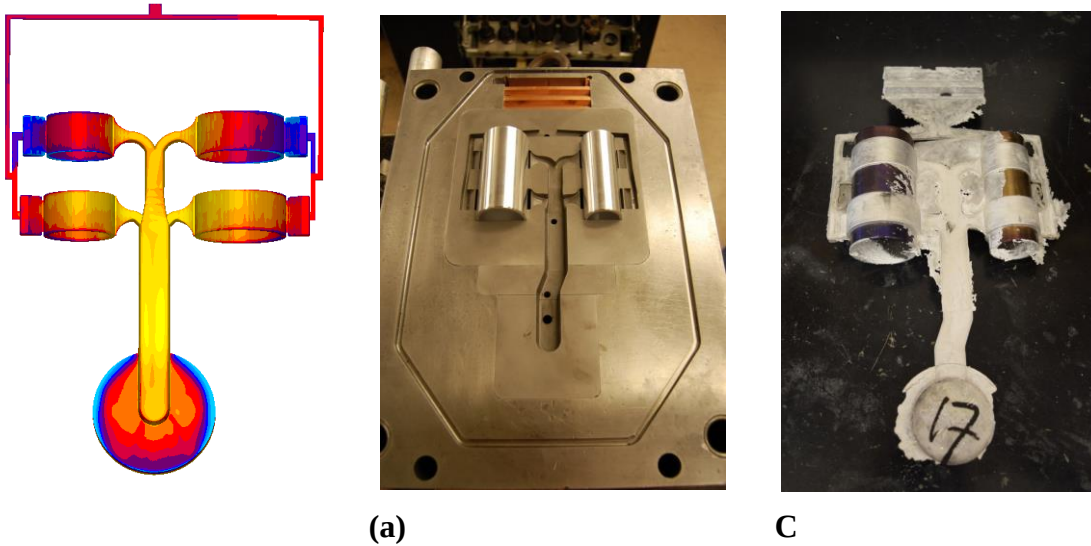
Overcasting of magnesium onto tubes. (a) Graphic showing biscuit, gating, ring castings, and overflows. (b) Photograph of ejector half of die, including aluminum tubes. (c) Photograph of casting that was made onto steel tubes.
